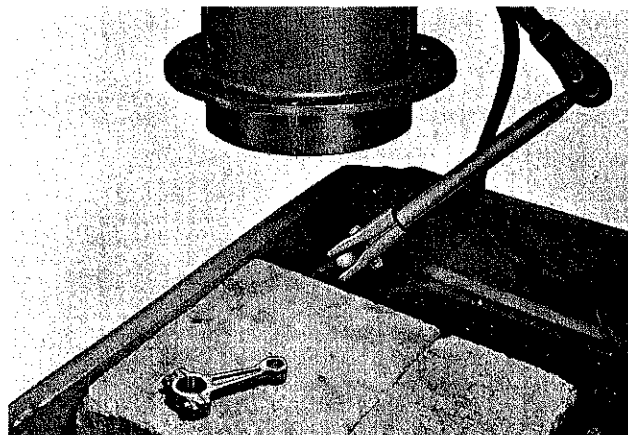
Heating the connecting rod eye prior to installing rod in the piston.
